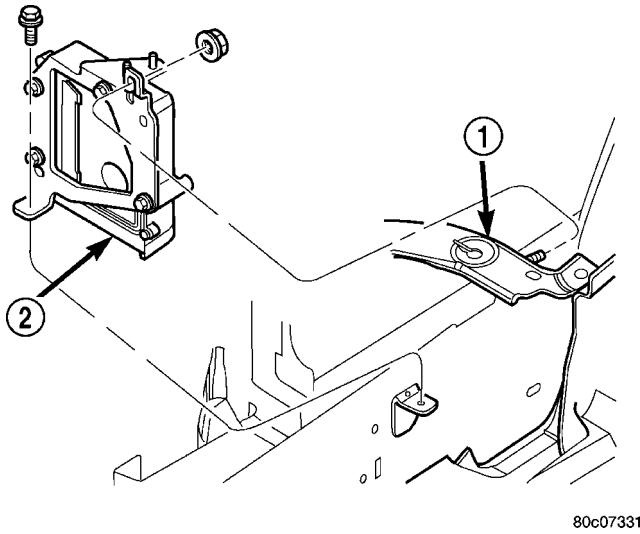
Transmission Control Module (TCM)—Removal/Installation
